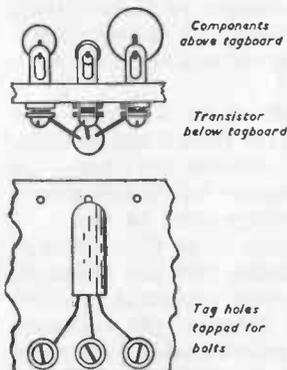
A METHOD OF MOUNTING TRANSISTORS
